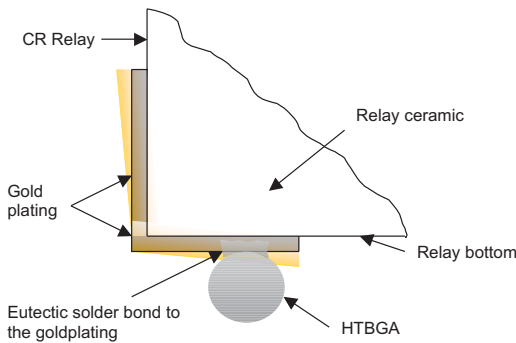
The CR Relay forms a strong eutectic bond between the relay solder pads and the high temperature BGAs.
